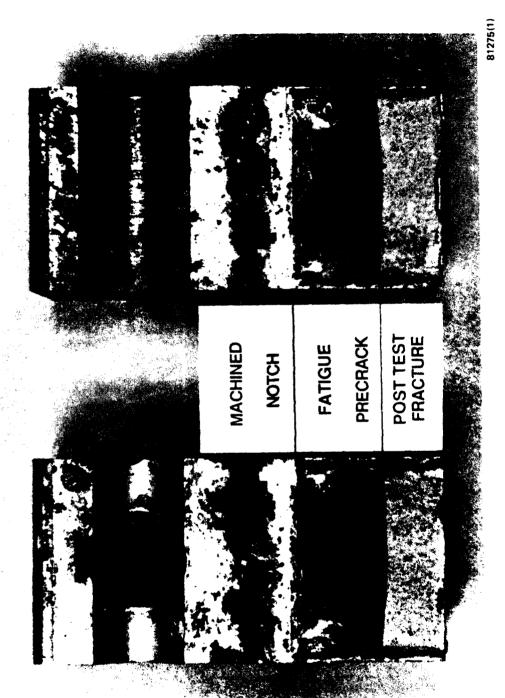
Configuration of the IT WOL fracture mechanics test specimen.
